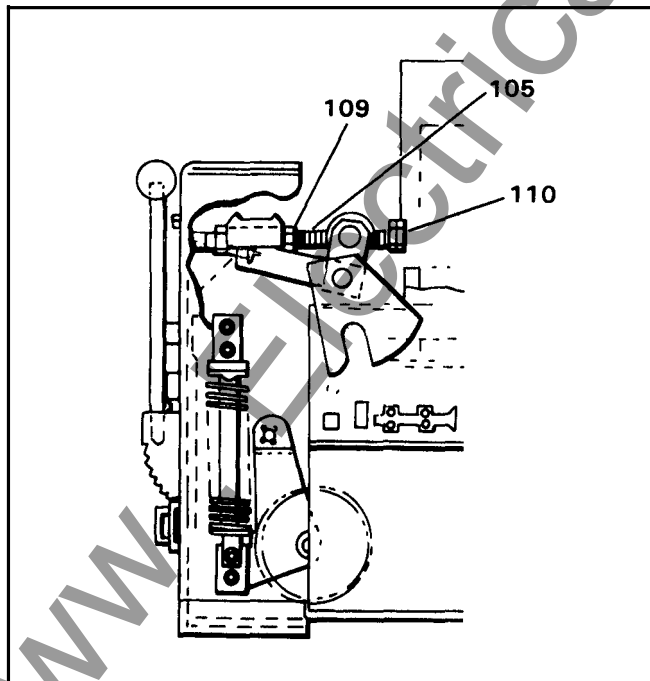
Detail of Typical Racking Mechanism and Drawout Interlock
